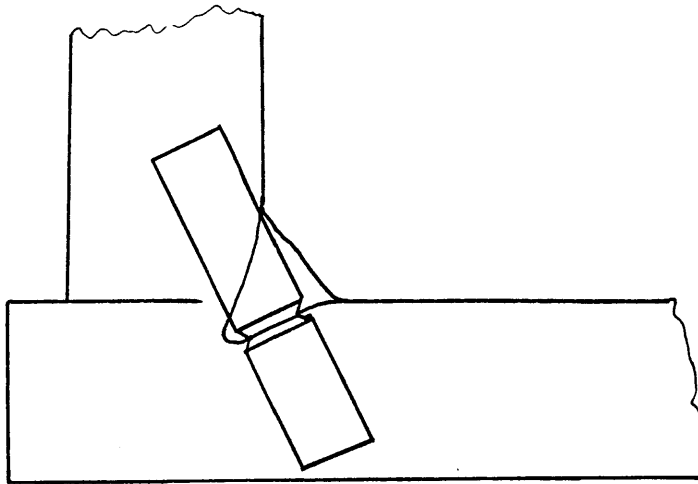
ii. Specimens as obtained from fillet welds.
